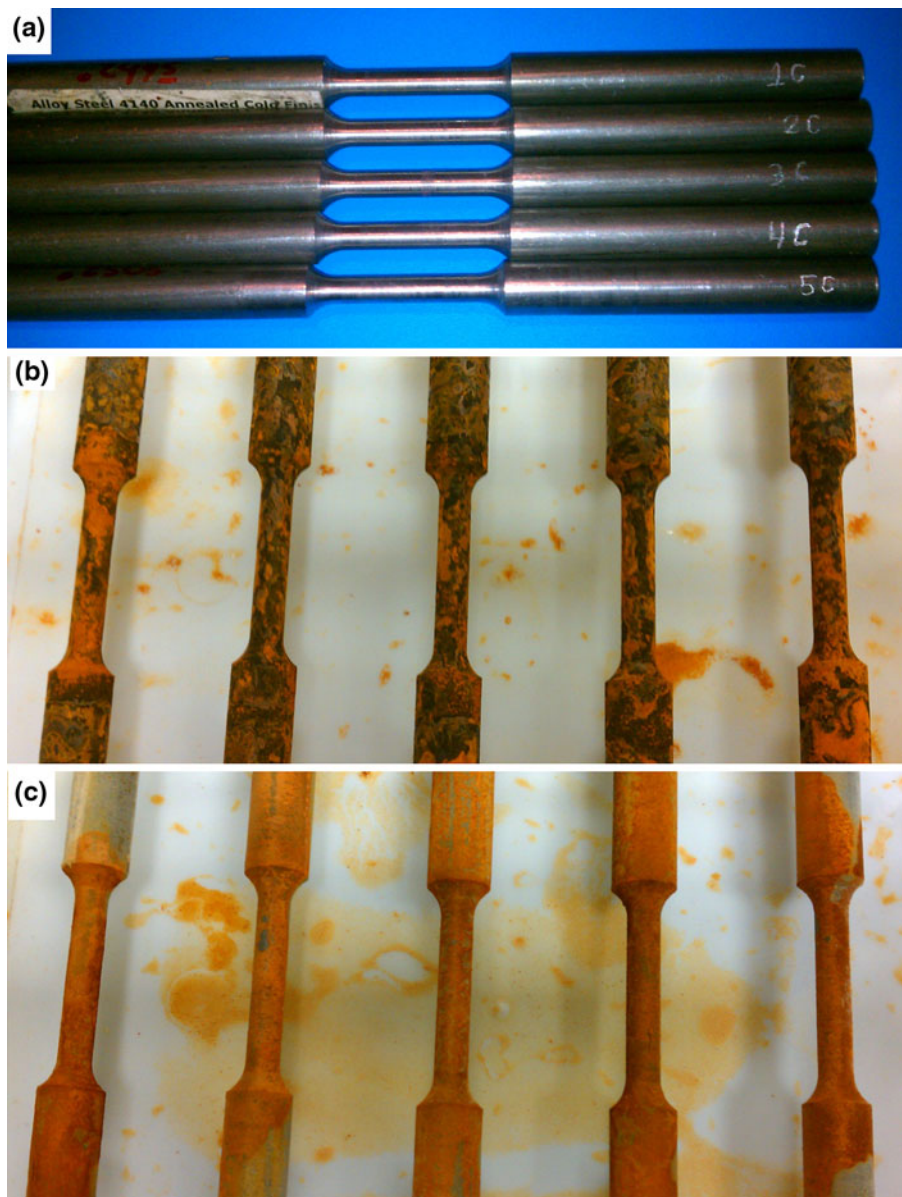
Fatigue test samples are shown in the (a) as-machined condition, (b) NaCl-corroded condition, and (c) CMA-corroded condition
